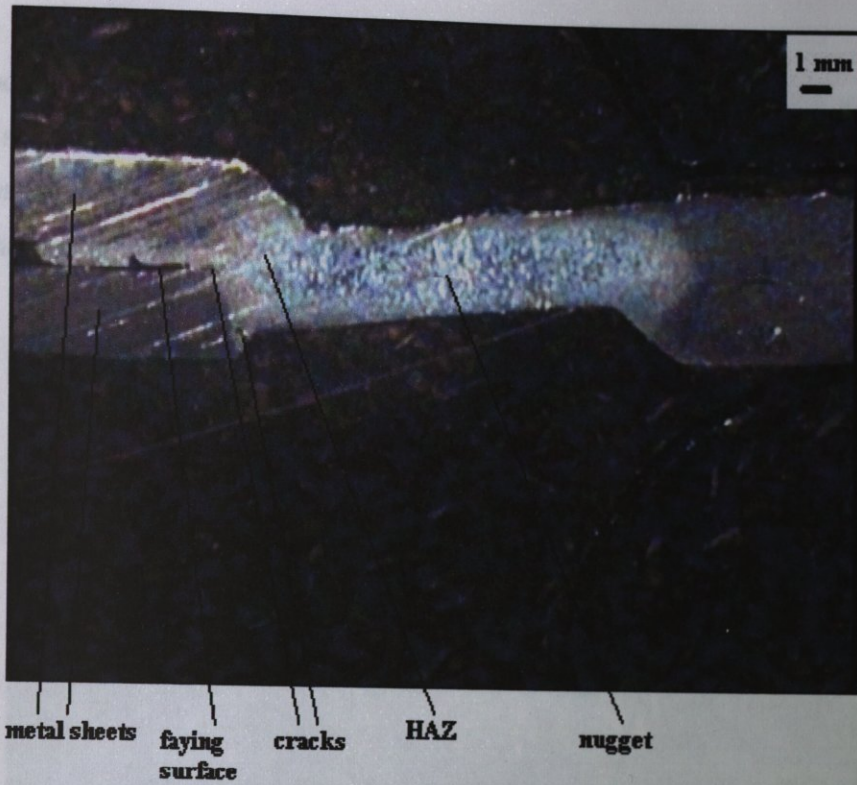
Cracks in nipper spot-welded MTS specimen
